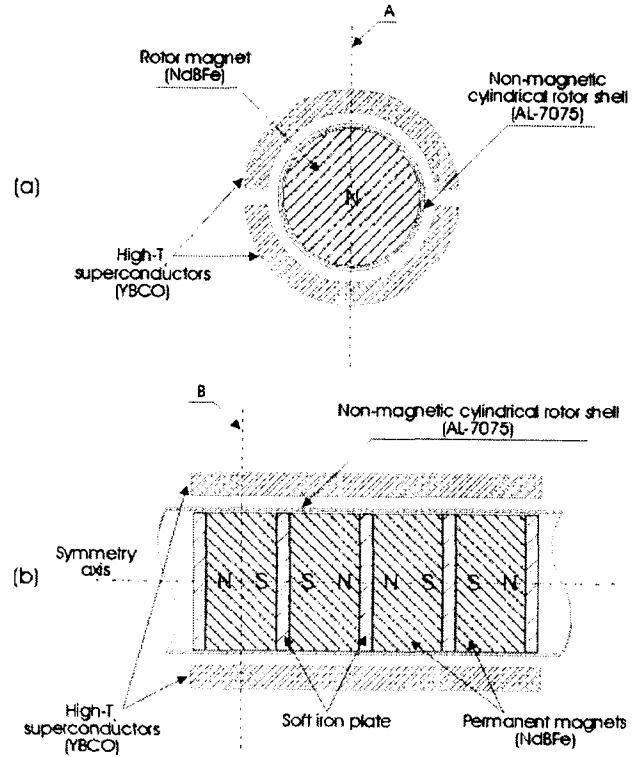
Schematic cross sections of the high- T_c superconductor journal bearings used in the KEPCO model flywheel device. (a) Cut perpendicular to the symmetry axis by the plane B. (b) Cut by the plane A.
